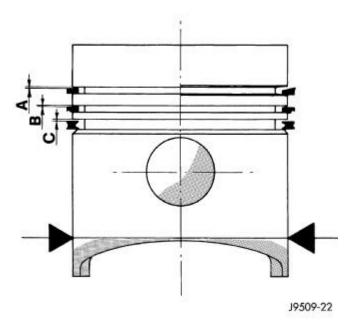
PISTON RING TO GROOVE CLEARANCE Courtesy of CHRYSLER LLC
